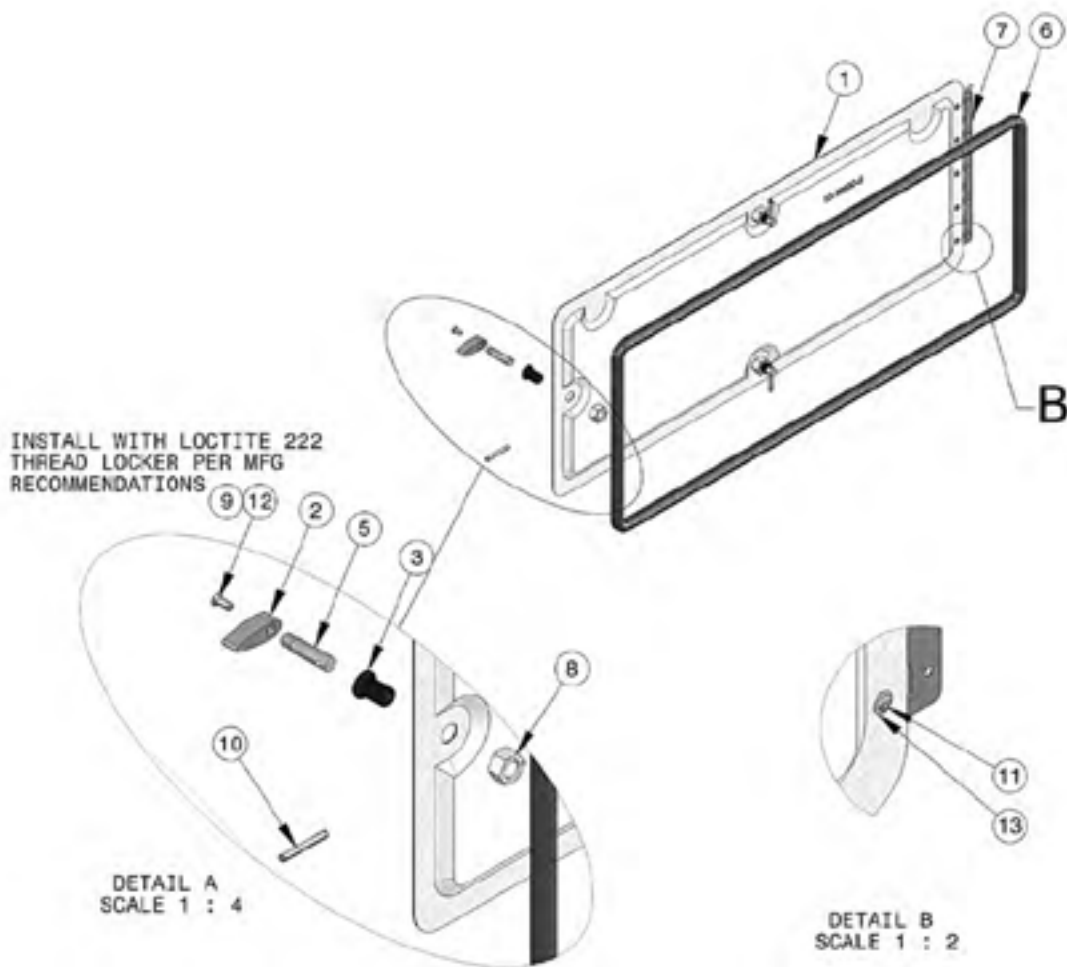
Parts Listing for 10-10030-1 Bottom Hinging Door Assembly
